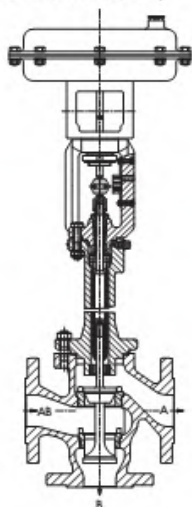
Type 3244-7 Pneumatic Control Valve with Type 3244 Three-way Valve, DN 32 to 150 (plug arrangement for diverting service), additional bellows seal and type 3277 Actuator
